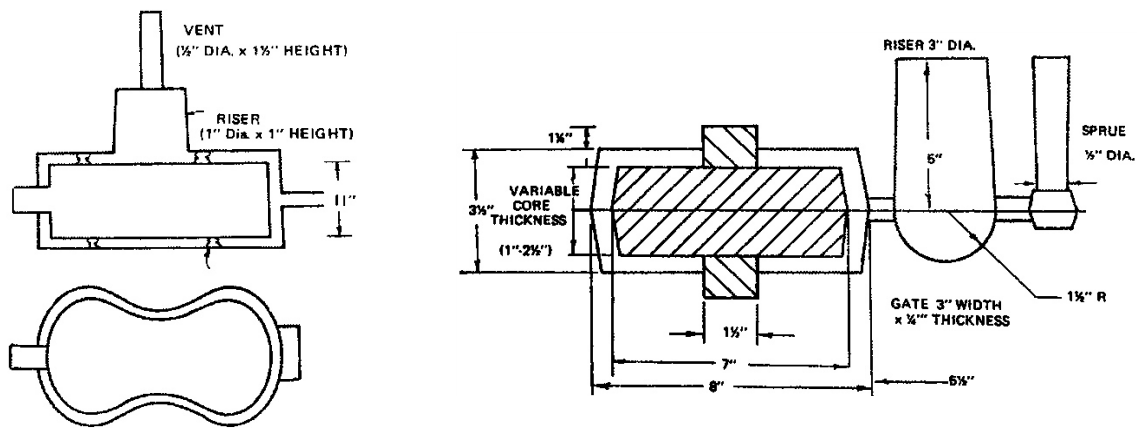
Test parts of cast-in dog bone tensile samples (1 square-inch cross-section) with chaplet support to hold constant wall thickness around the sample, gating and feeder system indicated (left) and disk test part with a mould drawing for sample production (right), [119].
